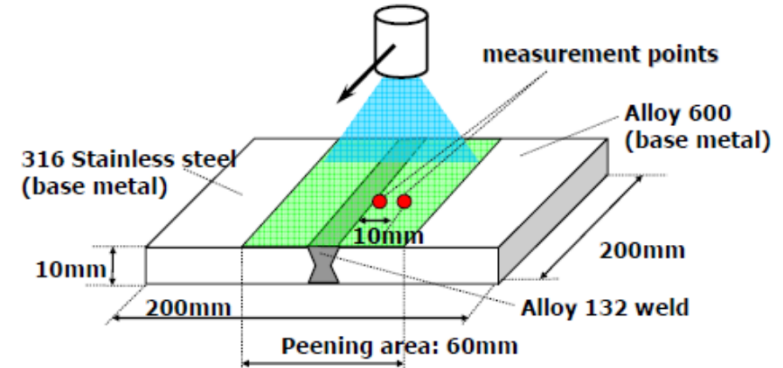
The mockup of butt weld for RV Nozzle safe-end
